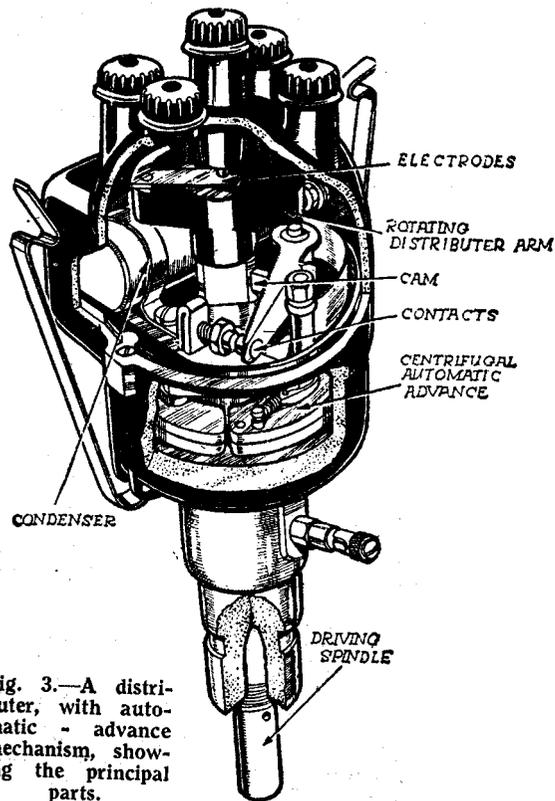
A distributor, with automatic - advance mechanism, showing the principal parts.
